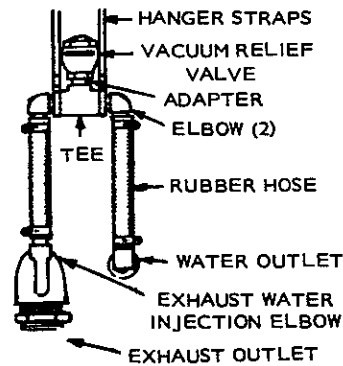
SIPHON BREAK ASSEMBLED
